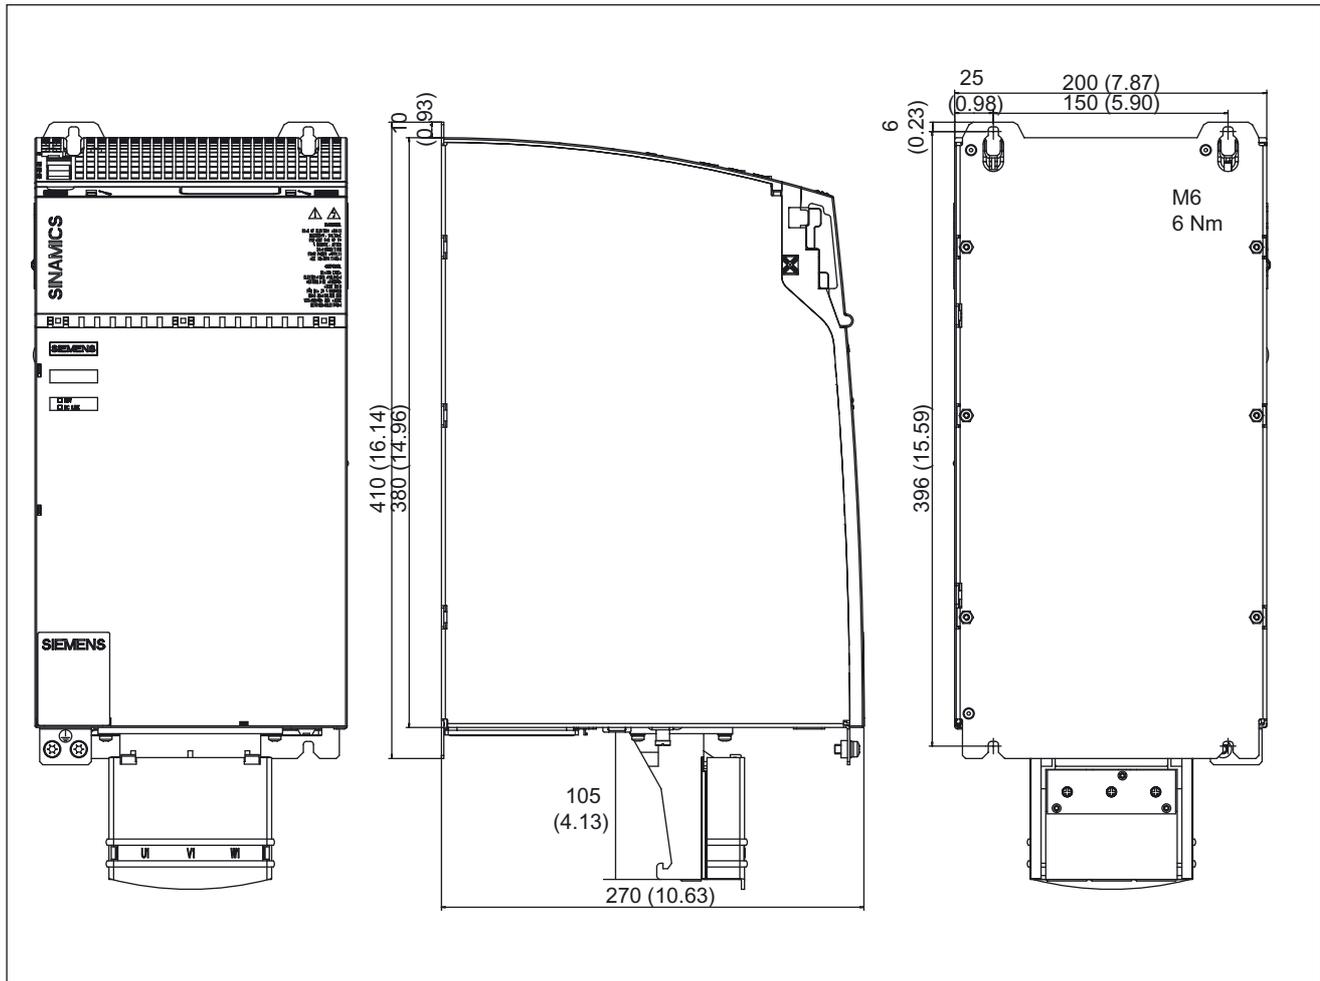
Dimension drawing of Basic Line Module 100 kW with internal air cooling, all dimensions in mm and (inches)
